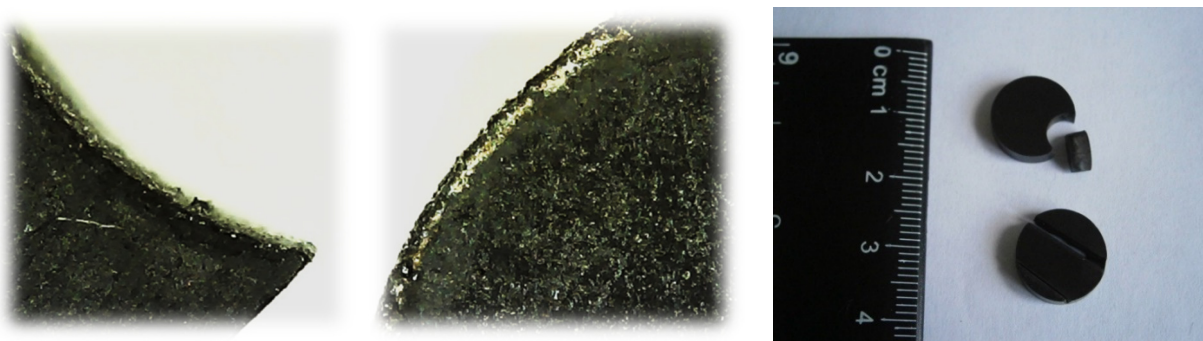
Sector cut from the experimental composite plate CBN + WC (TiS) and enlarged photos of the obtained surfaces
